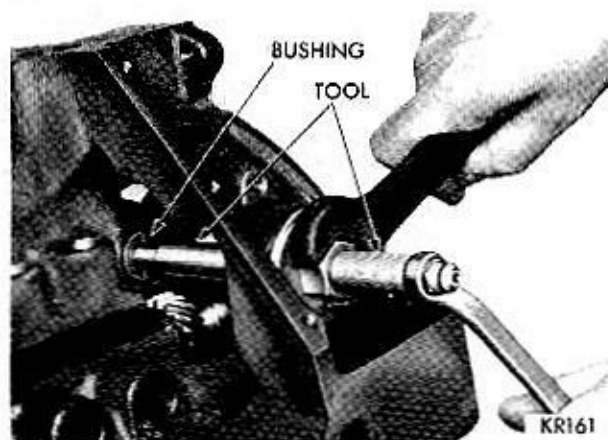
Burnishing Distributor Drive Shaft Bushing
